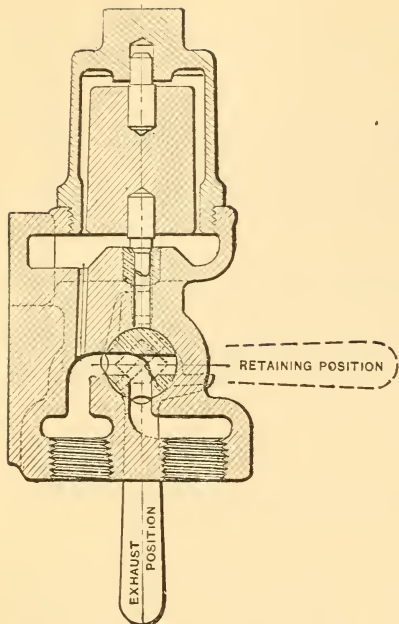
RETAINING VALVE USED WITH 12, 14 AND 16-INCH BRAKE CYLINDERS.
